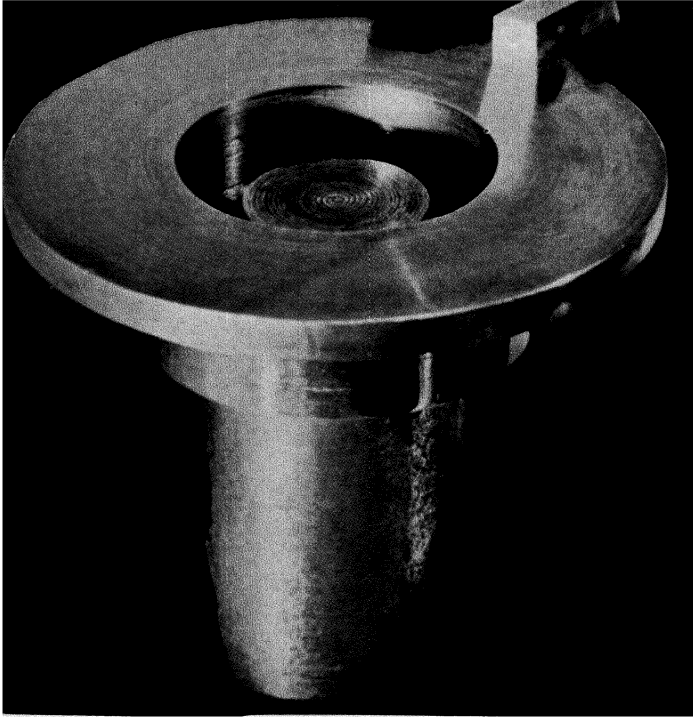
Grinding of cemented carbide tool tip with a diamond-impregnated wheel (according to Jones<sup>161</sup>).
